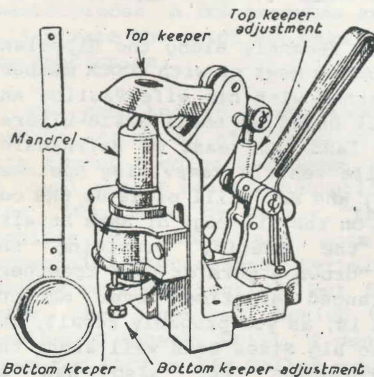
An Ammco universal jig which enables re-metalling to be carried out in rapid sequence on bearing shells of varying sizes.
